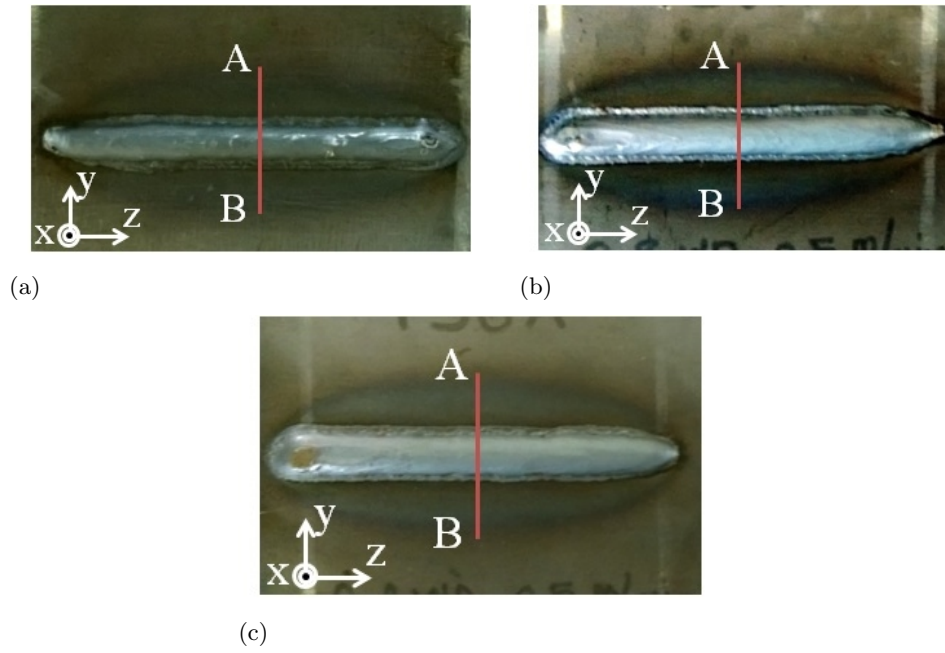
Top view of weld deposition made with different current ratings. (a) with 100 A (b) with 130 A and (c) with 150 A.
